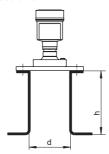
Socket mounting with deviating socket dimensions - flange with lens antenna
